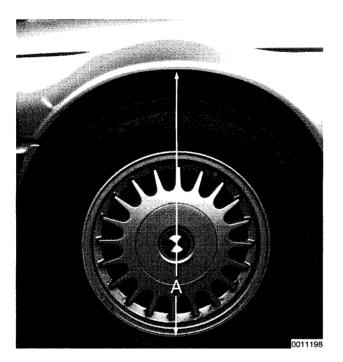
Ride height measurement (A) is taken from center of wheel arch to bottom of wheel rim.
